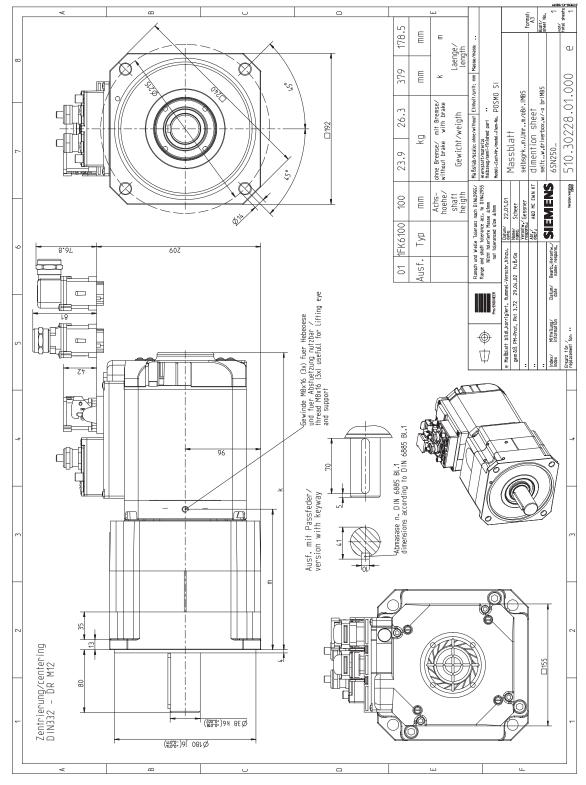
Dimension drawing POSMO SI 6SN2500–2CF00–0G□□
